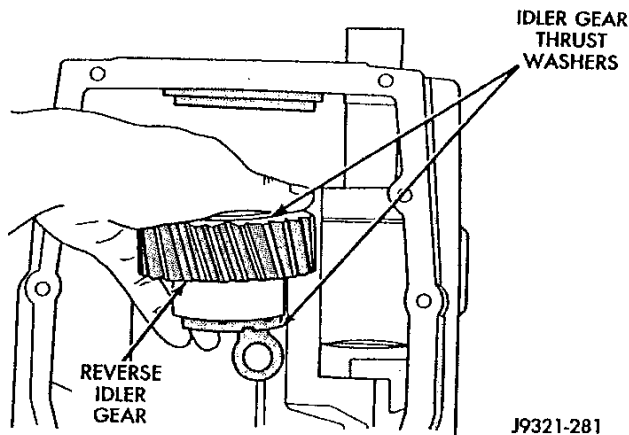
Reverse Idler Gear Removal (New Style Gear Case)
